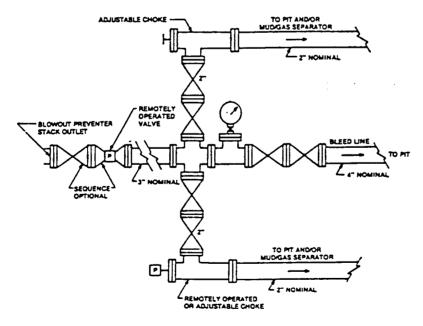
Typical choke manifold assembly for 5M rated working pressure service — surface installation.
